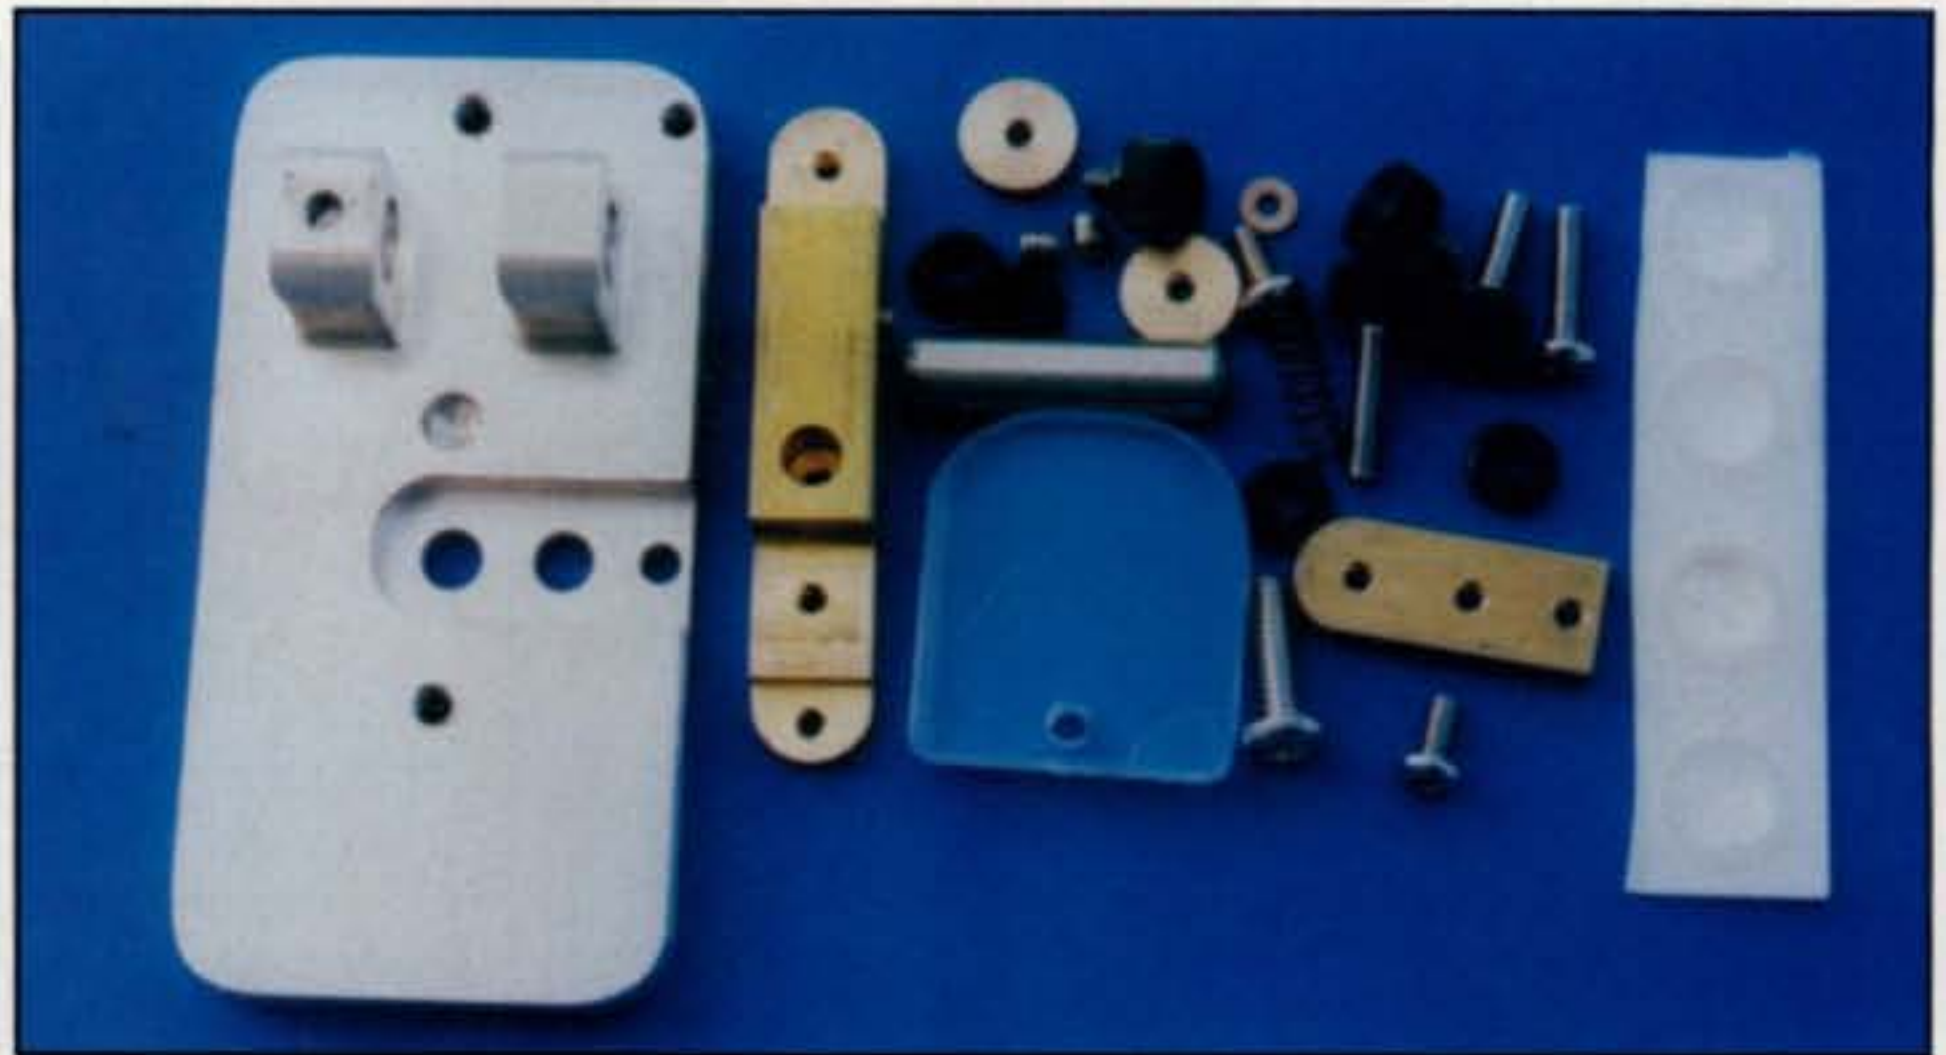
The American Morse kit key prior to assembly. Everything is predrilled and buffed, so all you need to assemble it is a Phillips screwdriver and a few minutes, which makes it a great project.
